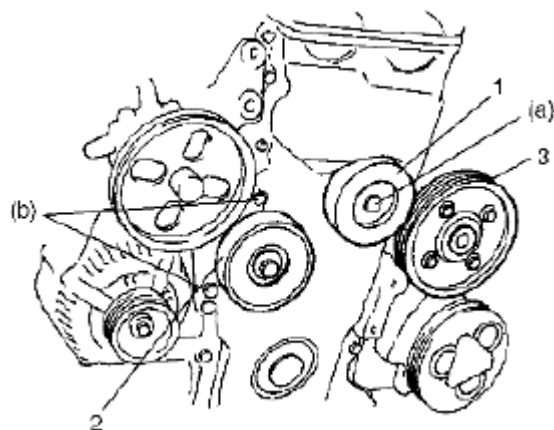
Identifying Water Pump Pulley & Belt Tensioner Bolts
